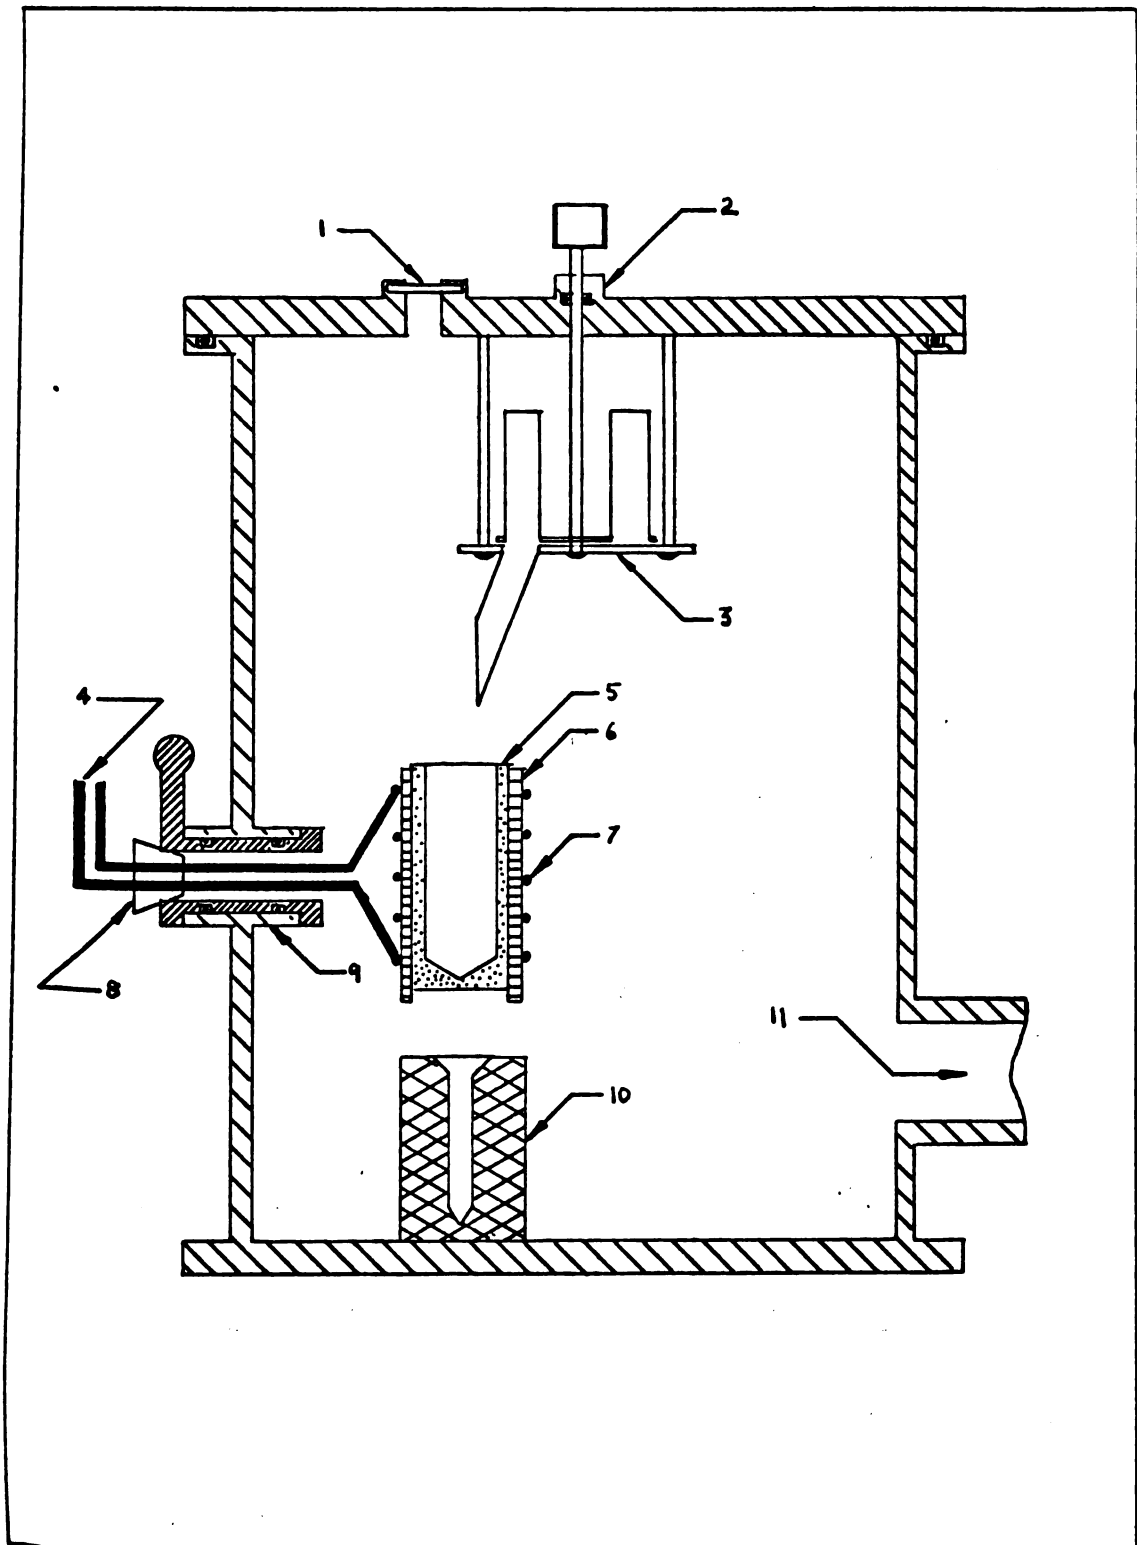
Induction Melting Unit. 1. Window 2. Rotating O-ring seal 3. Hopper assembly 4. Leads to induction furnace 5. Graphite crucible 6. Vycor insulation 7. Induction coil 8. Rubber stopper 9. Rotating O-ring seal 10. Copper mold 11. Vacuum line
